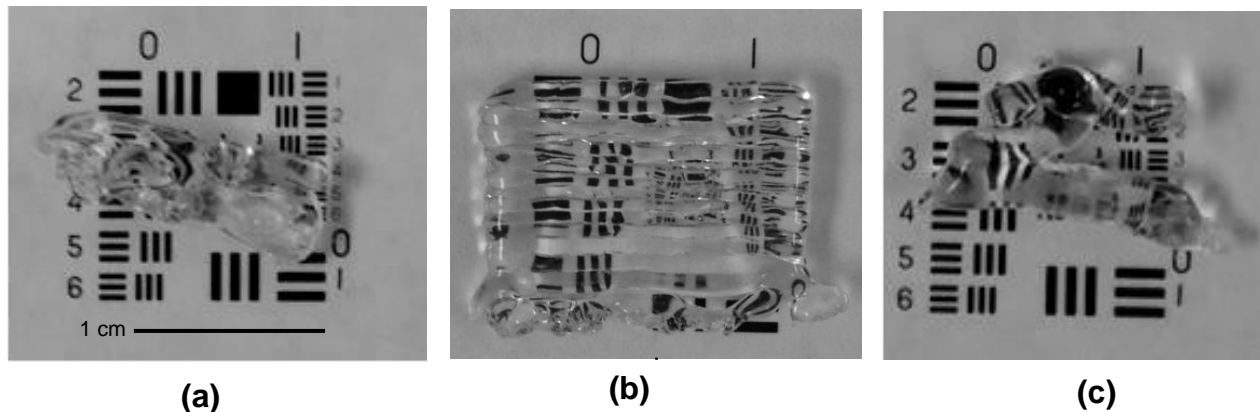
(a) A failed underfired wall (25 W) (b) A good wall (35 W) (c) A failed over melted wall (60 W)
